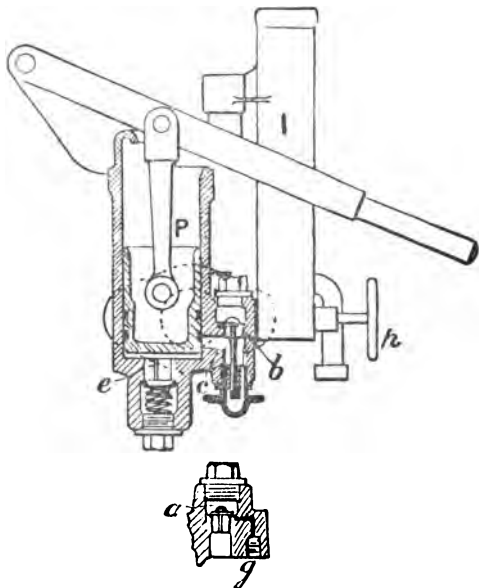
Pinkney's Self-starter for Gas Engines.
